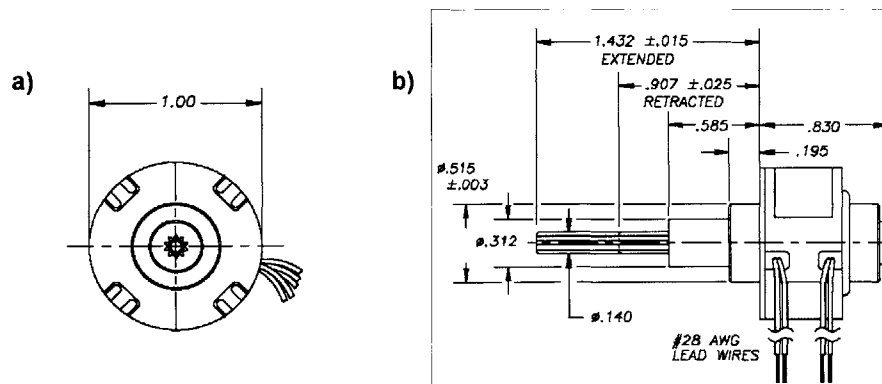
Cross sectional views of miniature stepper motor drive actuator
